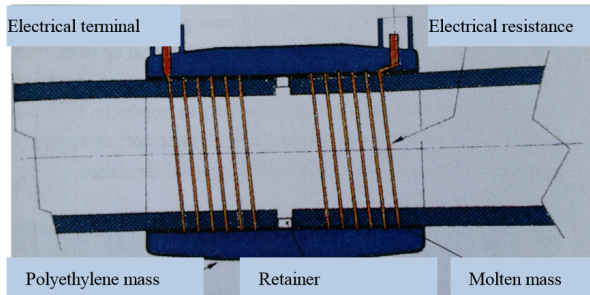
Mounting For Electrofusion Welding Polyethylene Pipes
